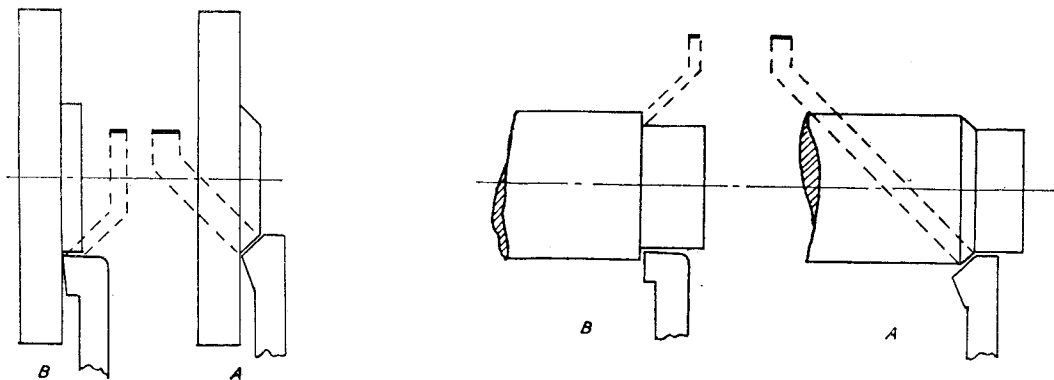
Showing how a bevel-edge tool presents a larger cutting area to the work
